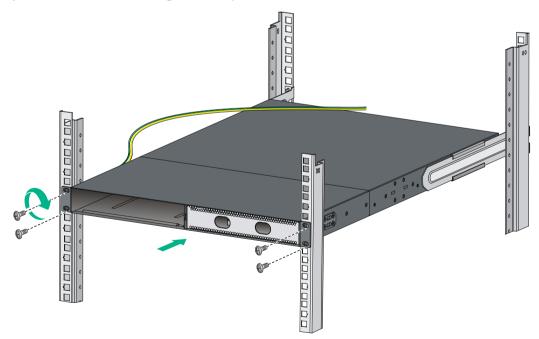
Mounting the HPE 5940 4-slot switch in the rack (power module-side mounting position for the mounting brackets)
